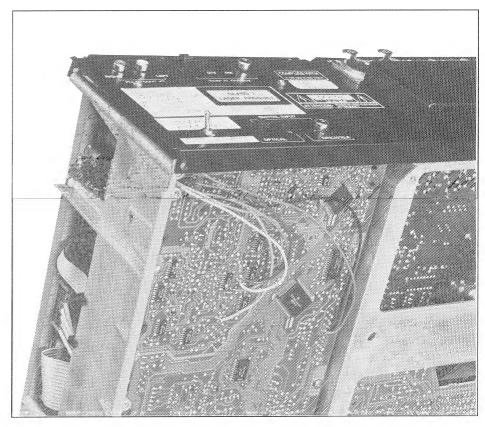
Connection of the special connection cable on the encoder board. Rear bottom view
